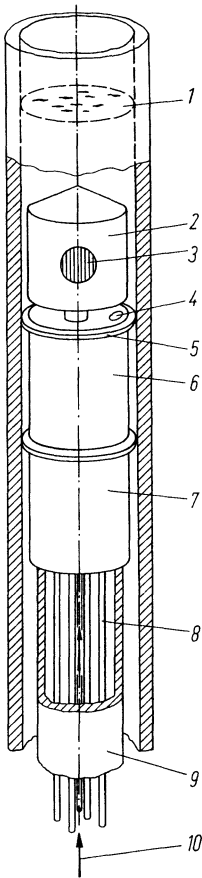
Combined test head for testing heat-exchanger/steam-generator tubes. It contains both ultrasonic and eddy-current probes (design KWU Erlangen). 1 level of coupling liquid, 2 rotating probe head, 3 ultrasonic probe and eddy-current probe, 4 exit hole for coupling liquid, 5 guiding and sealing ring, 6 housing containing electric motor, bearings, gears, electric transfer elements (slip rings), 7 preamplifier, 8 control and test cables, 9 transport cable, 10 feed of coupling medium
